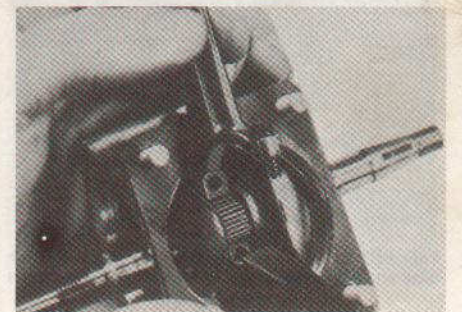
View showing correct method of installing connecting rod using the Pioneer special holding tool.
